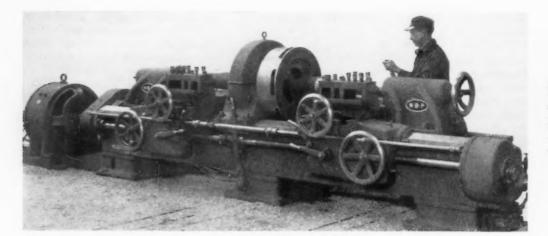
Center driven axle lathe with automatic equalizing driving head and multiple tool holders for operations on ends of axles.
